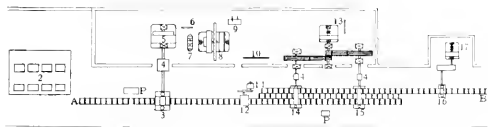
GENERAL LAYOUT OF ROLLING MILL
